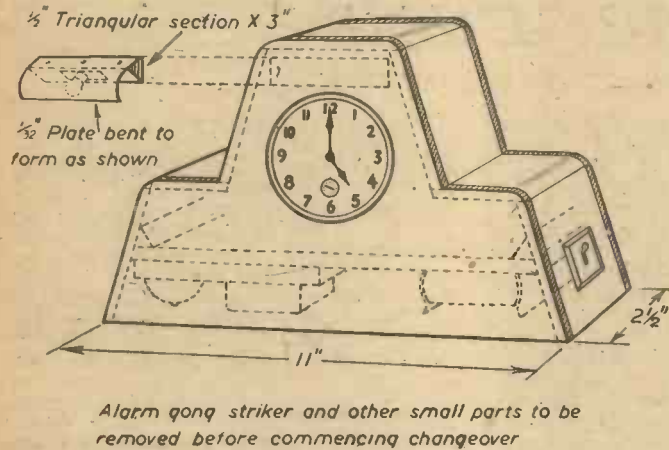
General view of clock, showing bulb mounting and case assembly.
